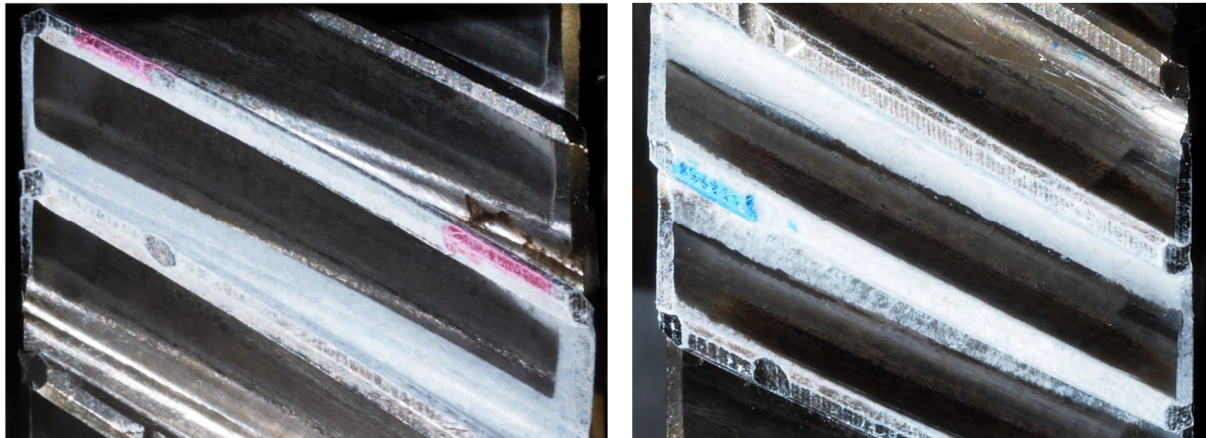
Result of the PM HIP:ed gears summative contact pattern test (3rd speed) by nominal test load (torque), gearset 2, gear 1 ($z=32$, left), gear 2 ($z=41$, right)
